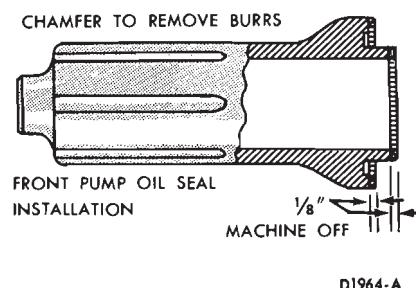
Front Pump Seal Installing Tool Modification Drawing
